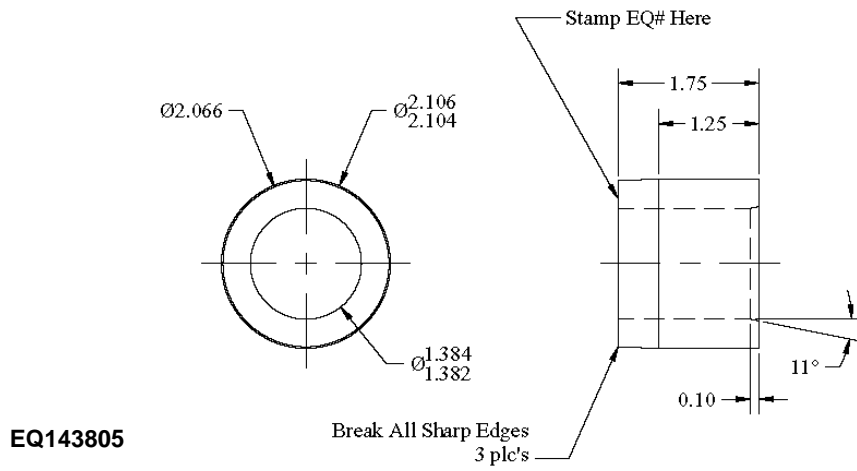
ASSEMBLY GUIDE FOR RINGS
